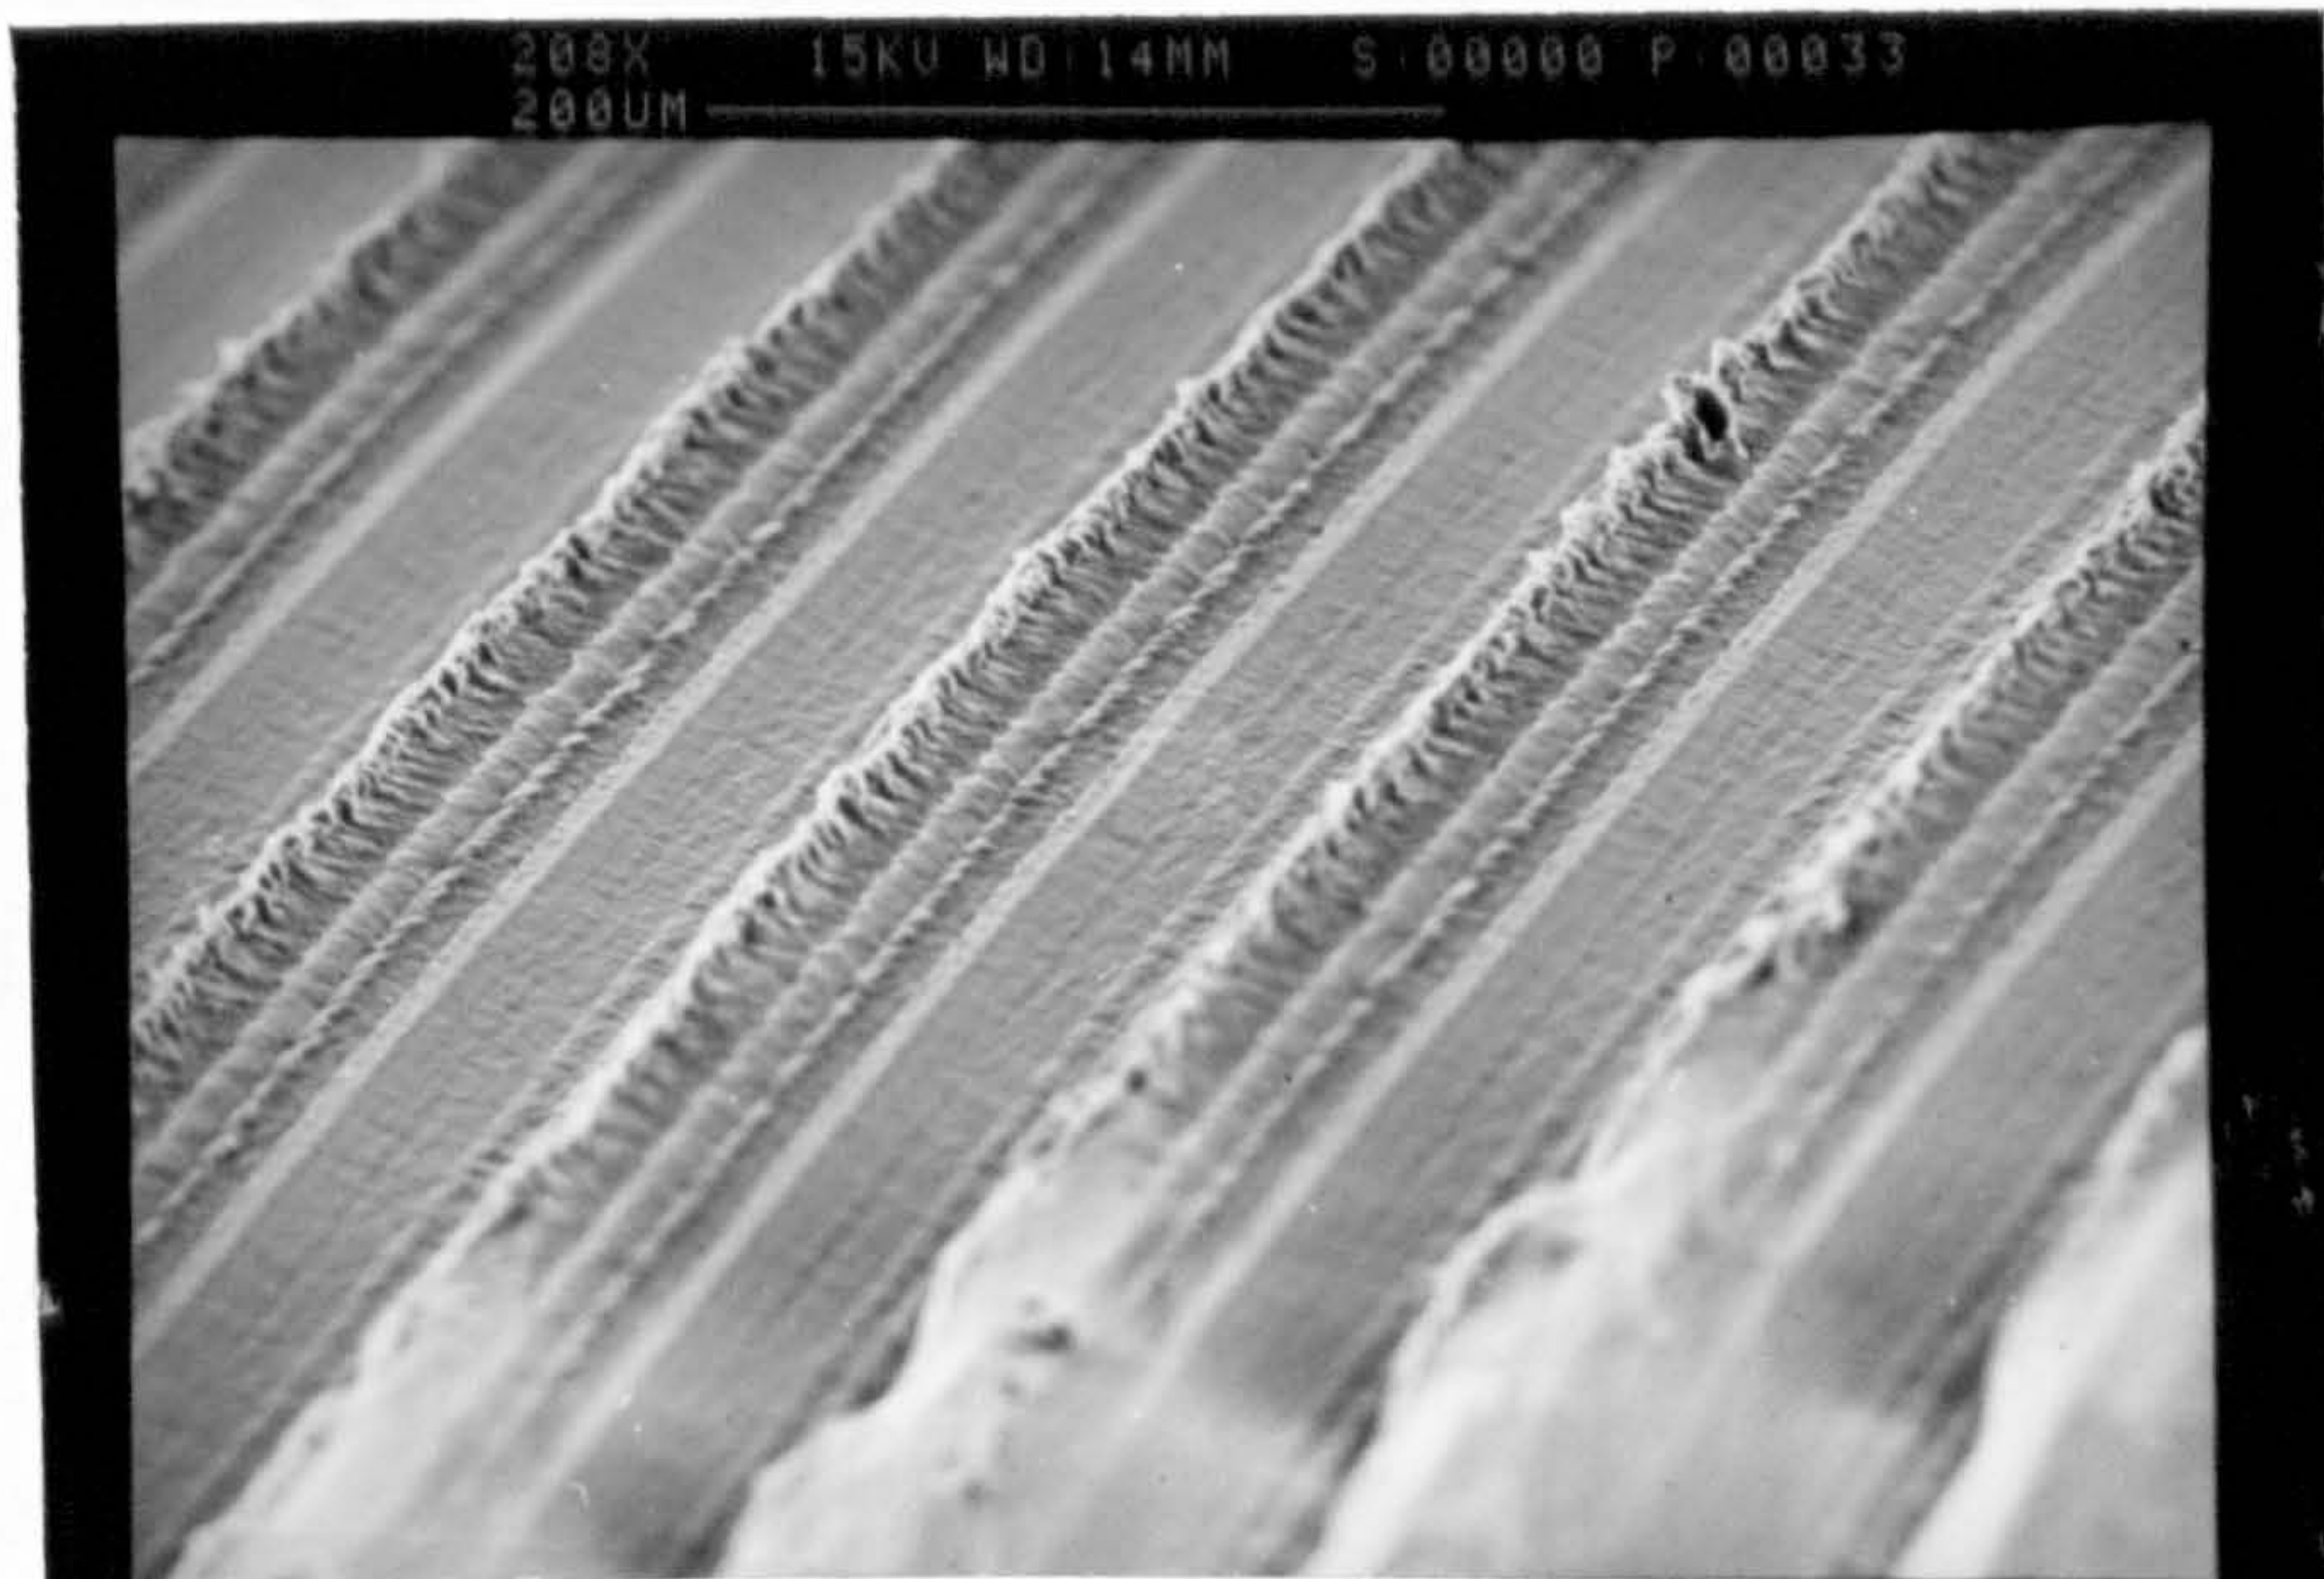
HDPE surface machined at  $0^\circ$  rake angle. (Speed = 250 m/min, feed = 0.16 mm/rev)
